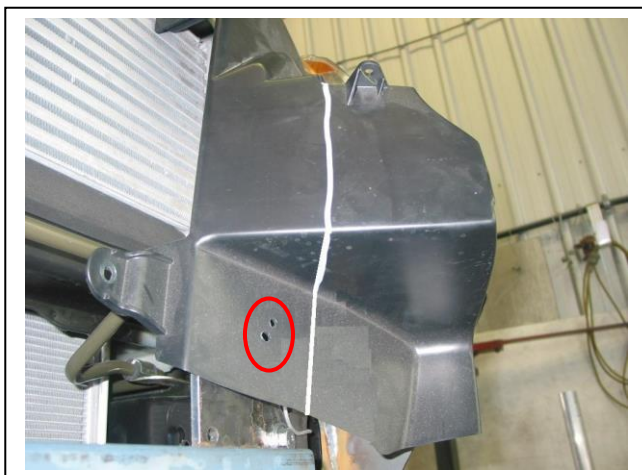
Passengers side air dam trim line and Air sensor positioning shown.
